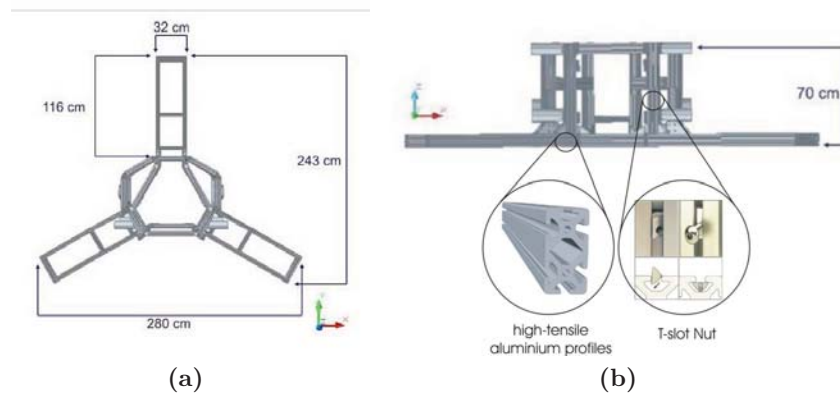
a) Scheme of PAU-SA's chassis (reinforced version) with dimensions, and b) 3D scheme of PAU-SA's chassis (reinforced version) with dimensions and basic material.
